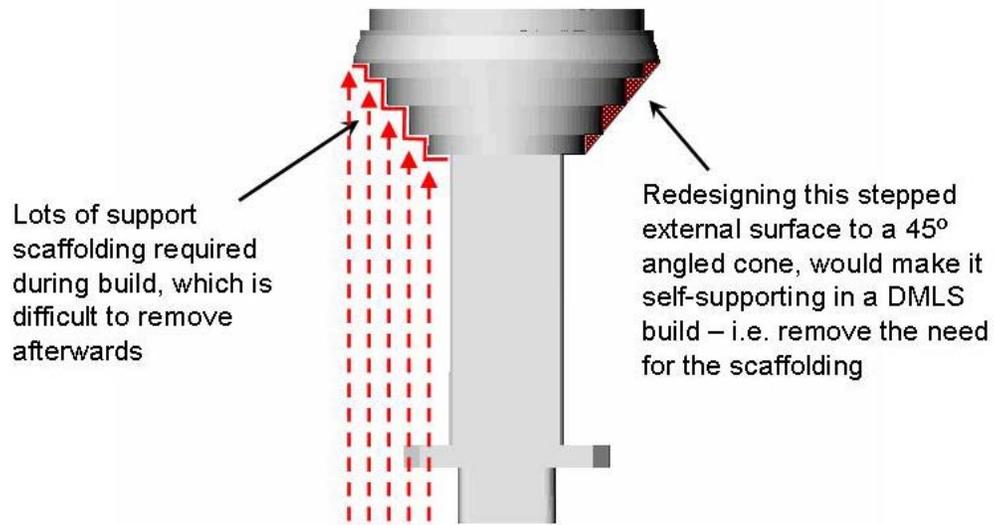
Drawing of the waveguide part showing the modification to the external surface of the horn which enabled most of the support structures shown in Figure 9 to be dispensed with.
